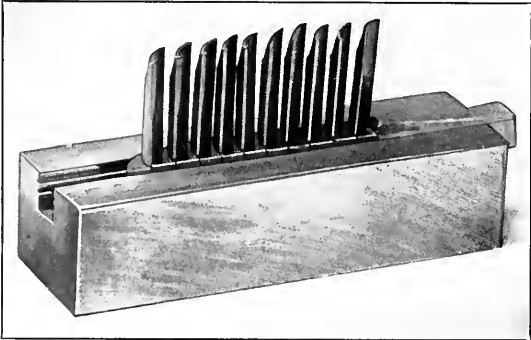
Model of a Section of the Rotor Groove, showing Blades, Calking Strips and Wedges in place
